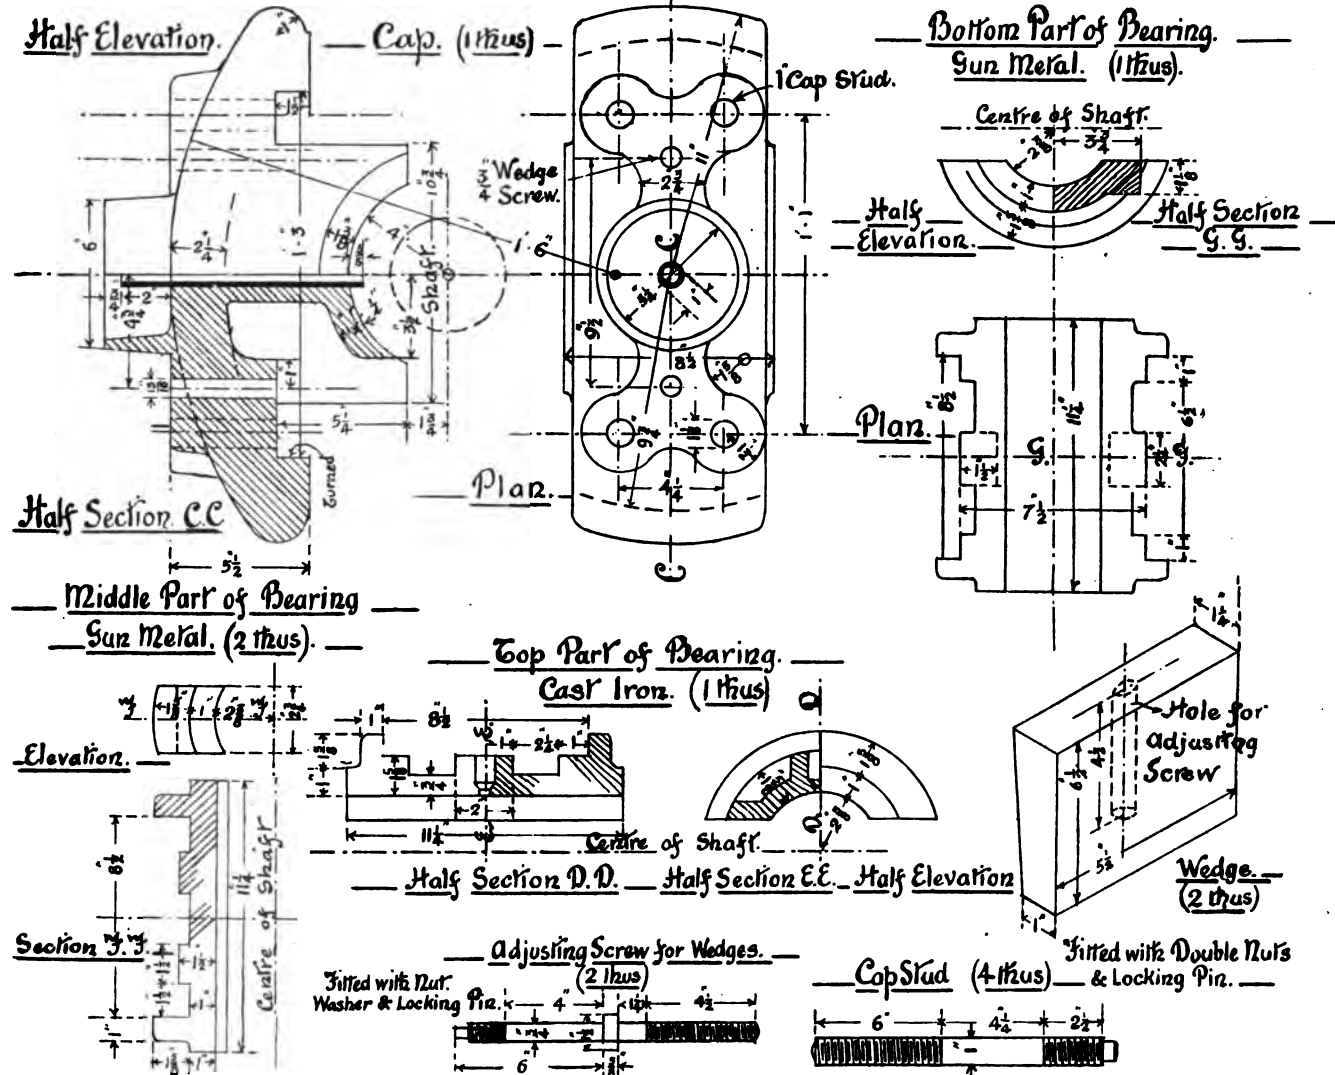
Details of bearing for crank shaft of horizontal engine.
